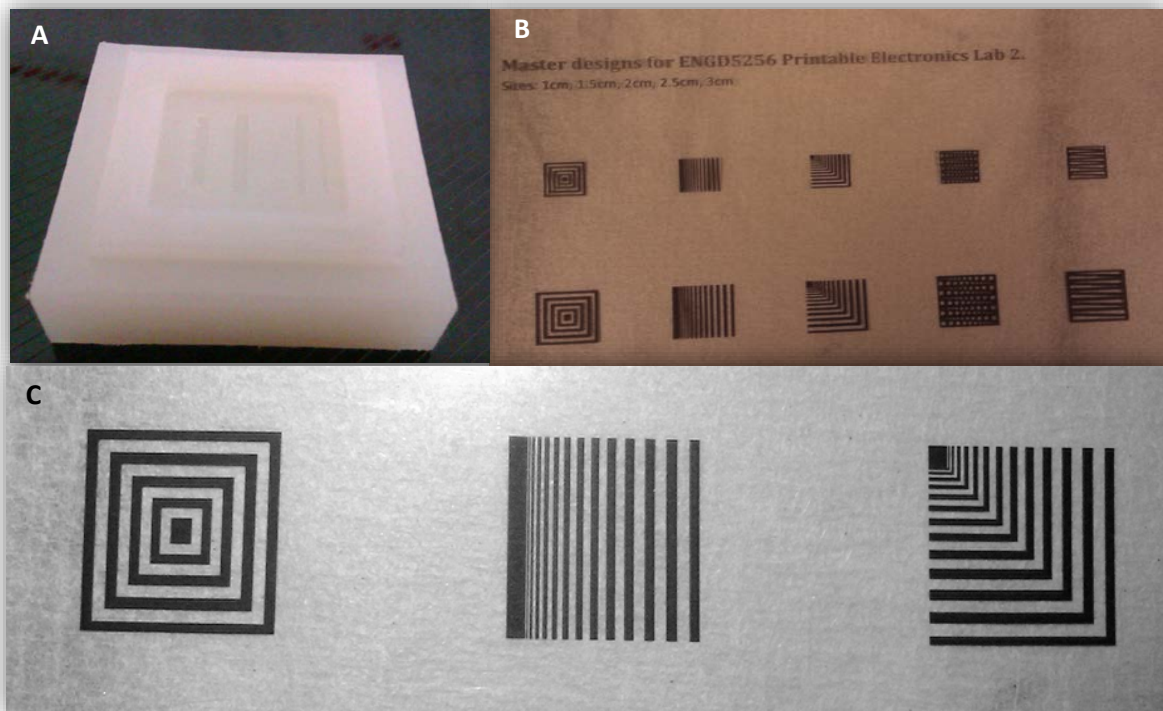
the stamp masters used in this research; a) lines engraved in the base of the casting unit, b) printed electronics laboratory masters, and c) the laboratory stamp masters that were used to test the stamp printing machine.
